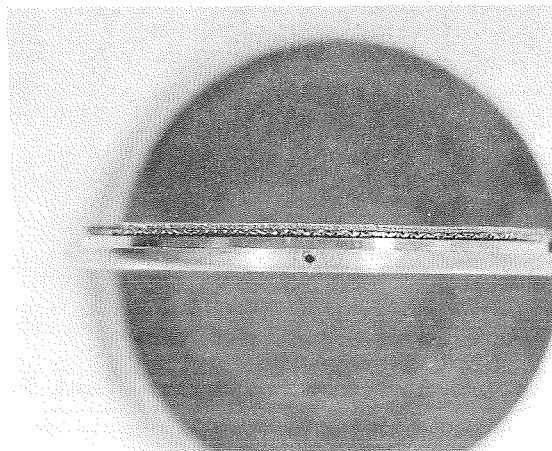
Edge View of Heat Pipe No. 3 Evaporator Wick
